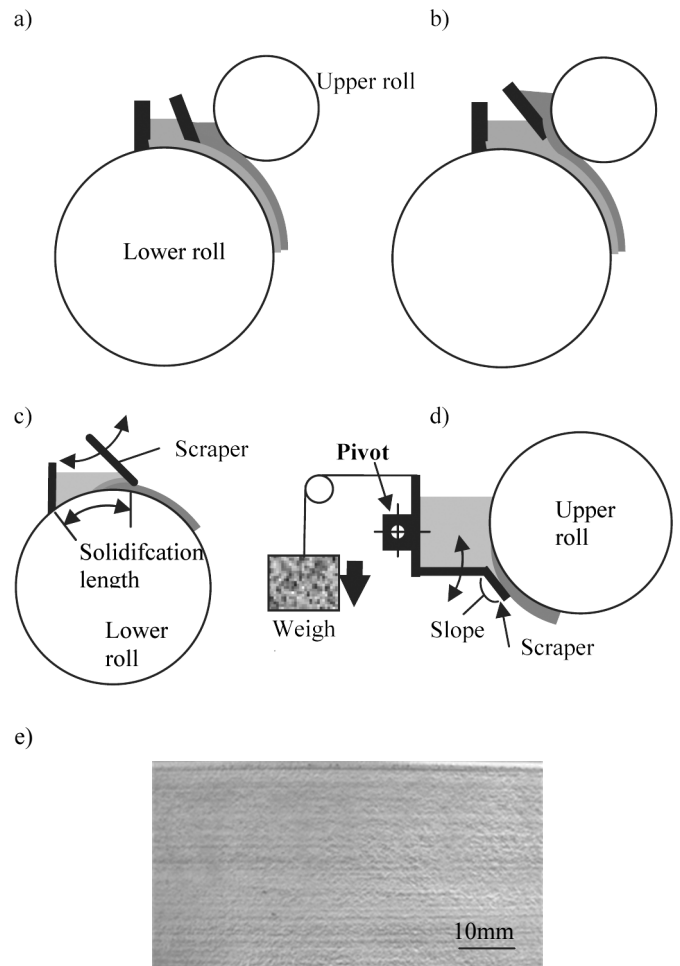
Schematic illustrations showing the twin roll caster to cast two layers clad strip. (a) the liquidus line of the metal solidified by a lower roll is higher than that of the upper roll. (b) the liquidus line of the metal solidified by the lower roll is lower than that of the upper roll. (c) around the scraper of (a), (d) around the upper roll of (b), (e) scribed surface of AA6022 strip
